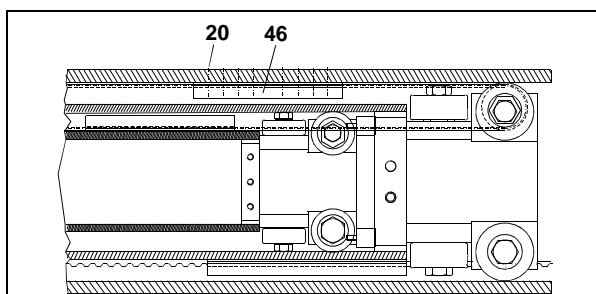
Remove main drive toothed belt and belt tensioner (Pos. Nos. for HTR80)
